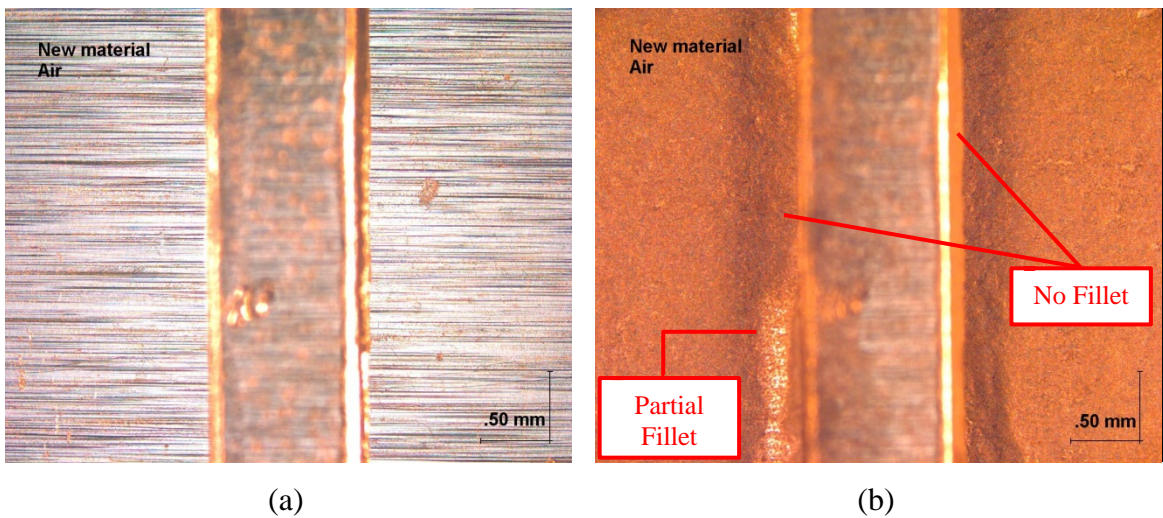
Trillium™ Brazing Sheet in Air (a) Before and (b) After the Brazing Process. Test II.
